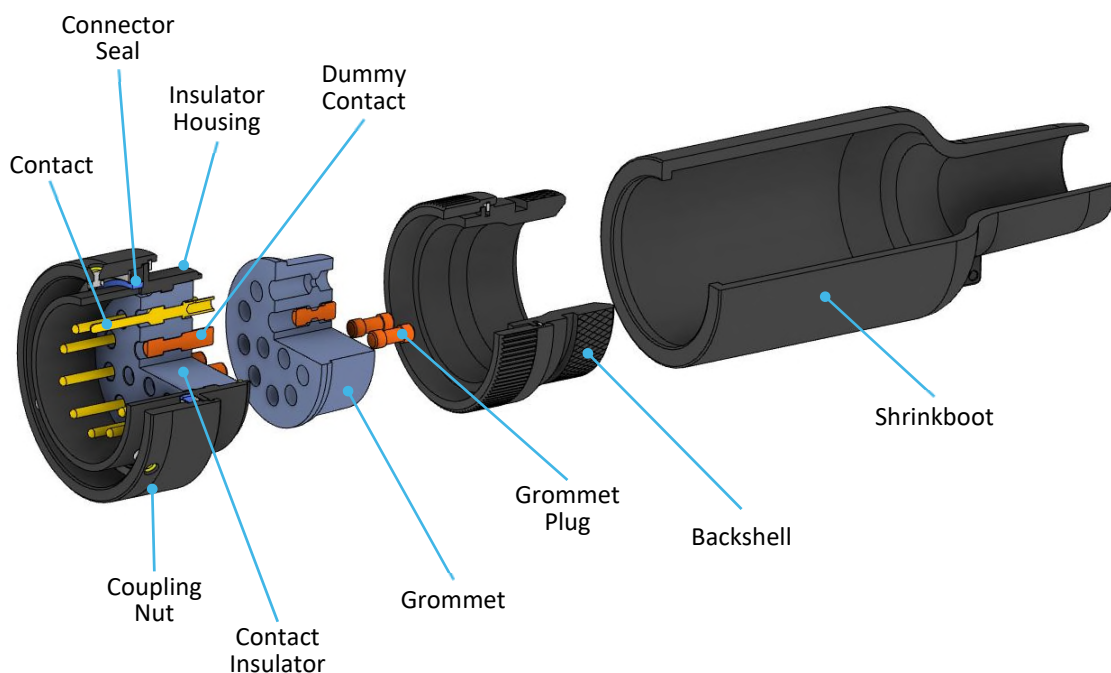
ABCIRH Series, Receptacle Connector Assembly (Cable Coupler Style) with Heat Shrink Adaptor and Shrinkboot
